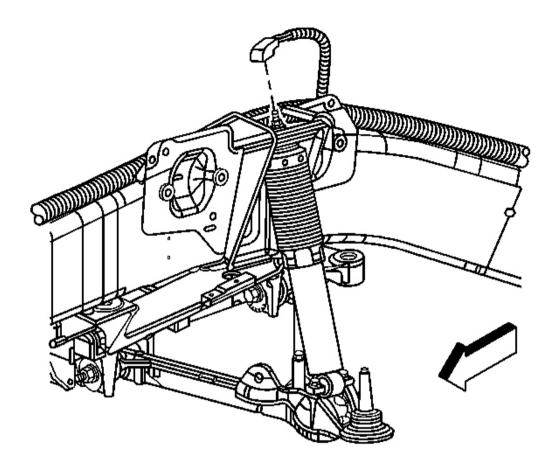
Front Shock ESC Harness Connector Courtesy of GENERAL MOTORS CORP.
